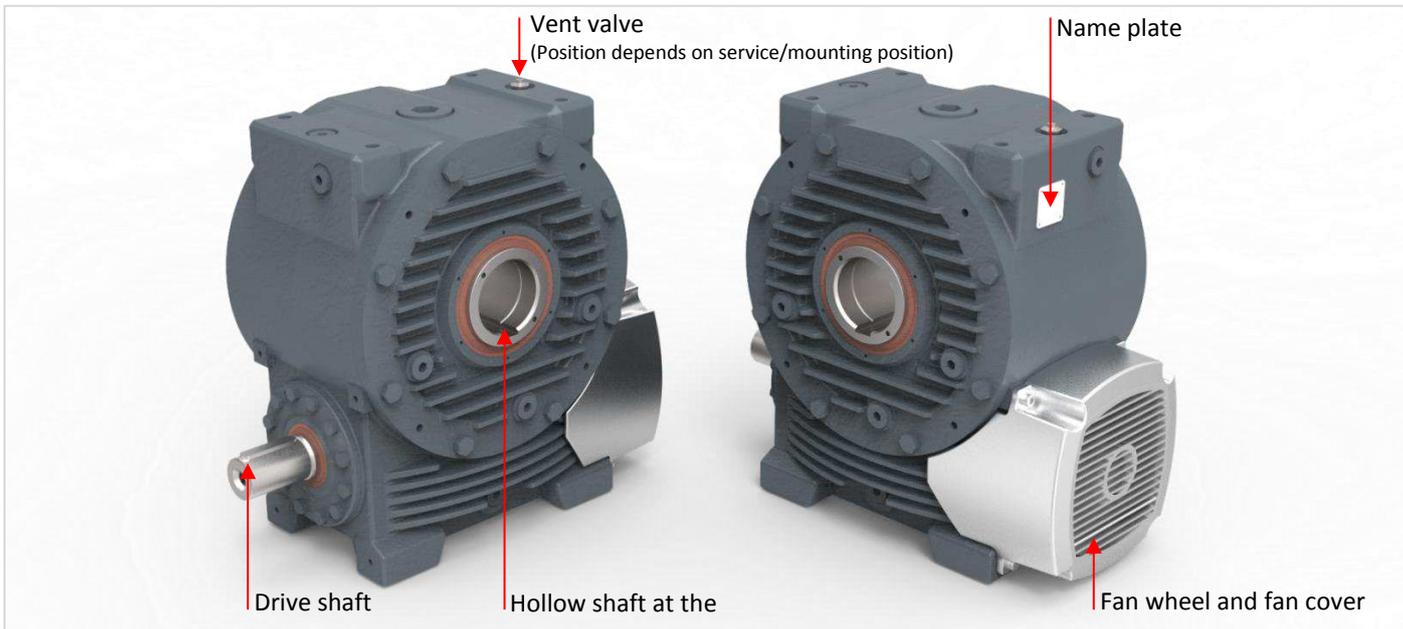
Design of basic version (shaft at input, hollow shaft at output), using the example of S250.1 in service position B3
